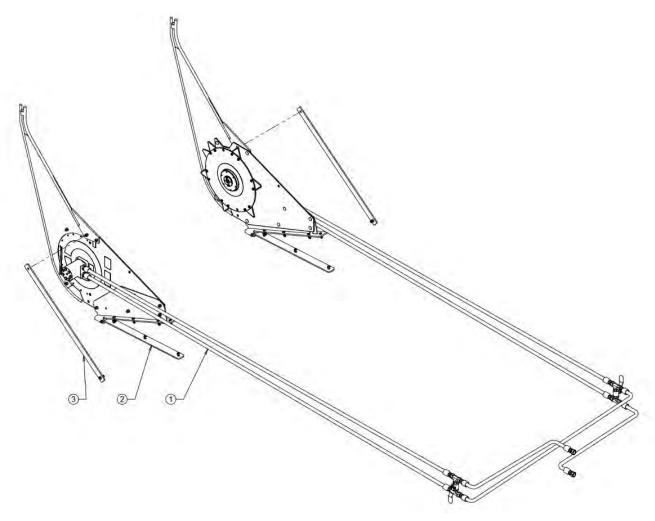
Roto-Shear MacDon 972 Header (27000-05)
